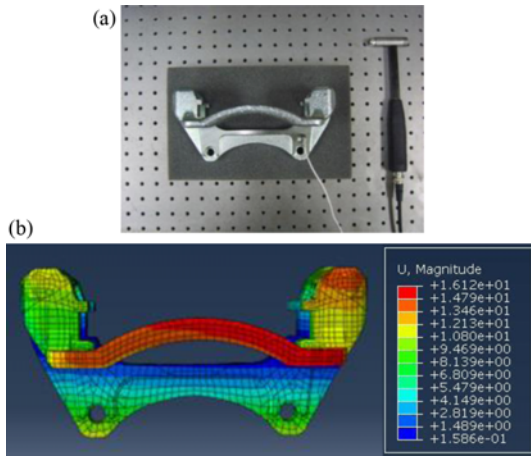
Actual (a) and finite element carriers (b) of disc brake caliper (legend: amplitude [mm])
